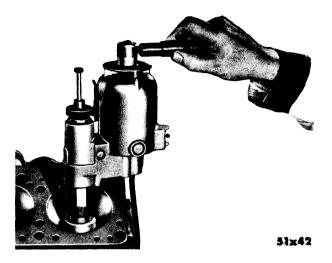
Grinding Valve Seats (Tool MTH-JB-41)
